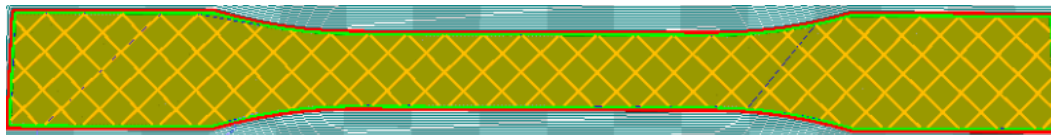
Cross-sectional view of the 20% infill tensile test specimen taken from Cura
